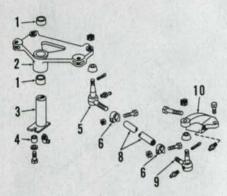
Exploded view of bellcrank and tie rods used on fixed axles. Refer to Fig. 3 for parts identification.
